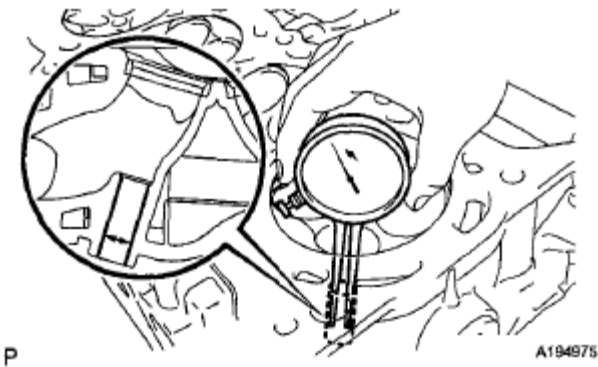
Measuring Bush Bore Diameter Of Cylinder Head
